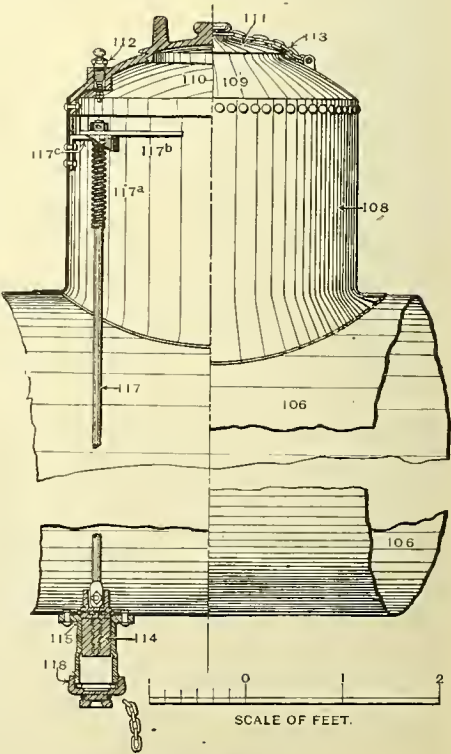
Sectional Elevation of Tank, Dome and Valve.
